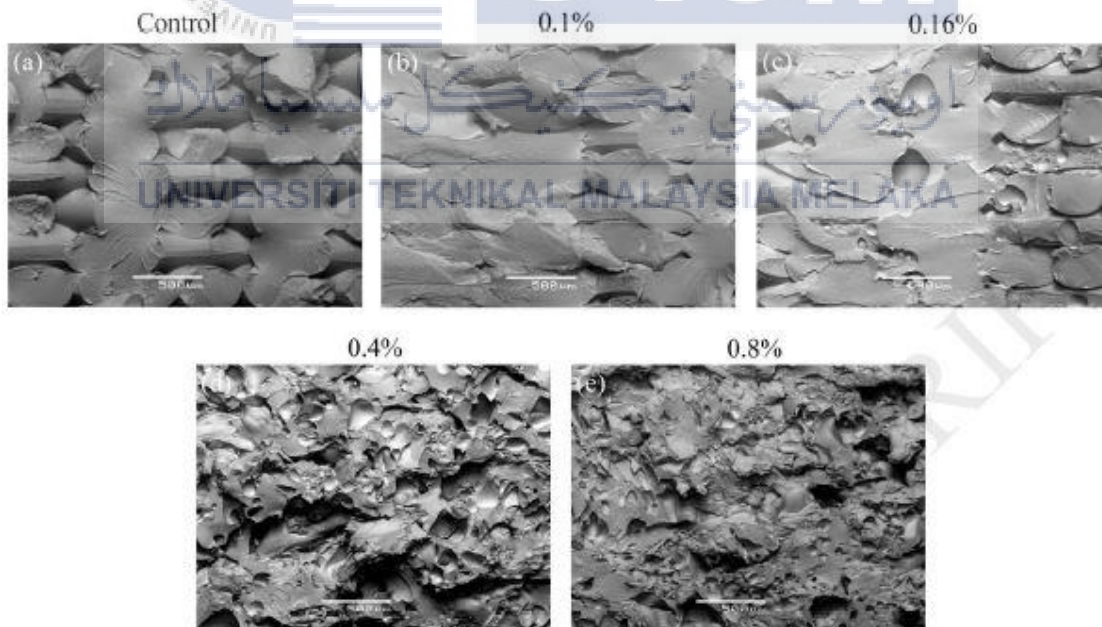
Fracture surfaces of dog bones produced using ULTEM®9085 filaments (Zaldivar *et al.*, 2018)
